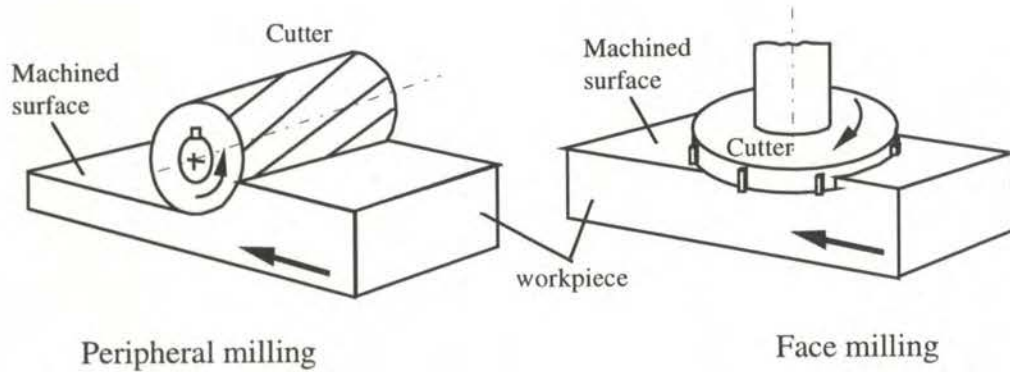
Relative motion of cutter and workpiece in peripheral and face milling.
